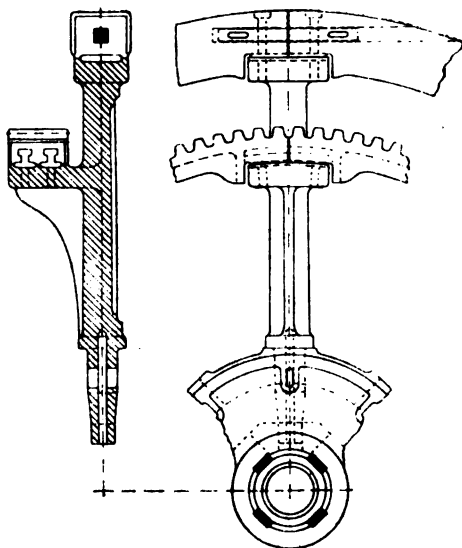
Fly-wheel, with spur segments of reduced diameter.
